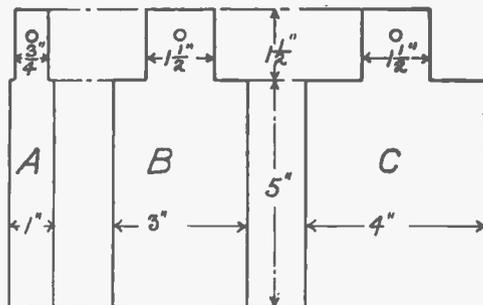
DIMENSIONS OF CARBON AND ALUMINUM PLATES
